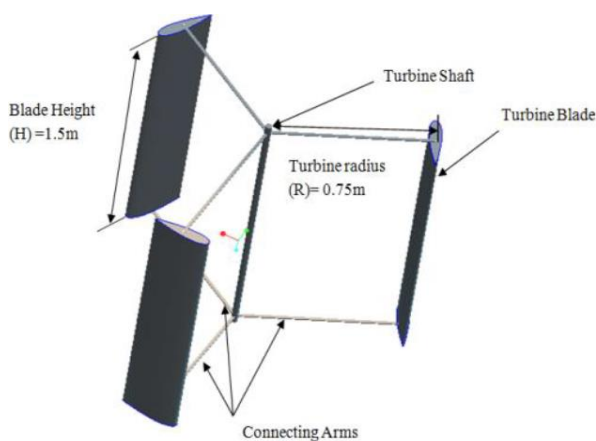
Three-dimensional model illustration of the H-Darrieus turbine
